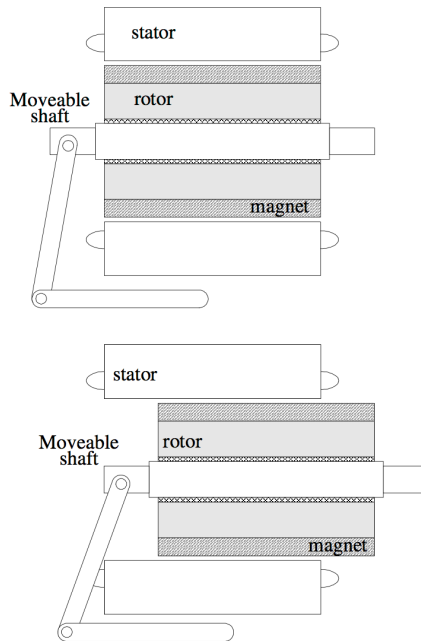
Brush-less PM Machine mechanical shaft rotor displacement
